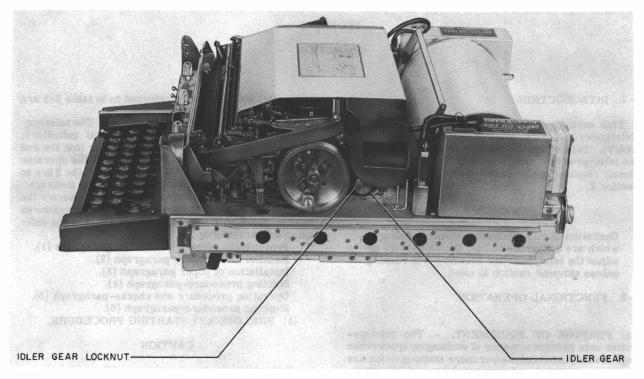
Printer and Electrical Chassis, Right-Side View
